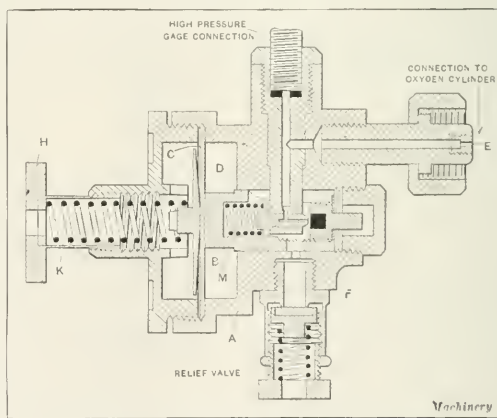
Diagrammatic Section of Oxygen Welding Regulator made by the Oxweld Acetylene Co.
